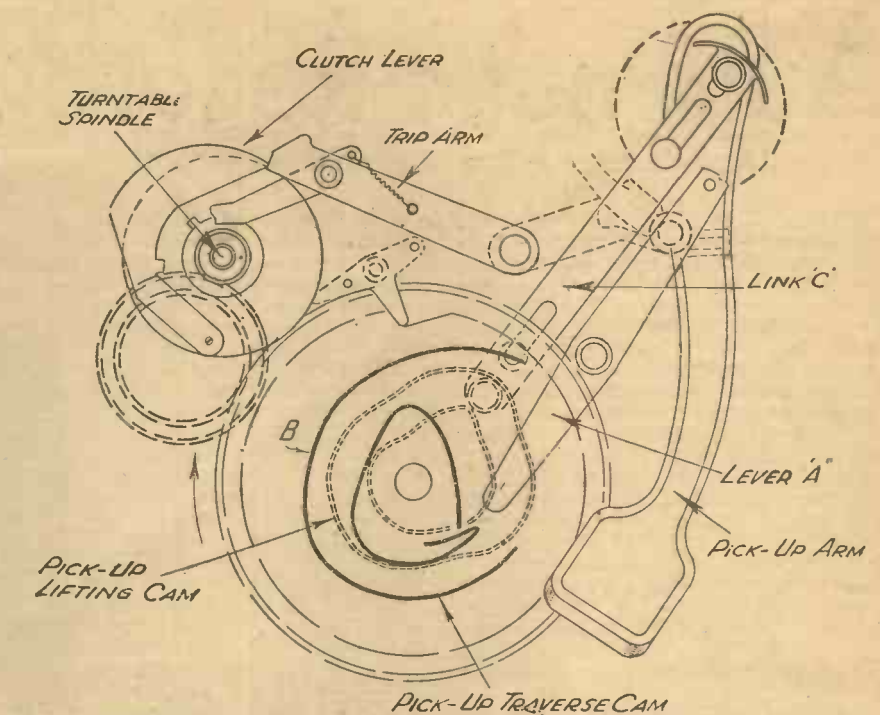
Simplified diagram of the H.M.V. unit showing clutch mechanism, gearing, and pick-up cams.
